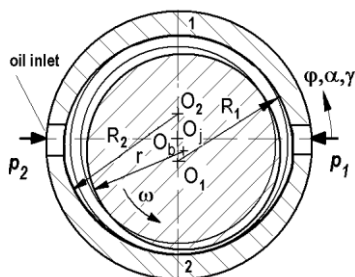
Geometry of 2-lobe journal bearings; a)- 2-lobe bearing; r - journal radius (m), R_b - bush radius (m), R_1, R_2 - radius of upper and bottom lobe, O_b, O_j, O_1, O_2 - centre of bearing, journal, bottom and upper bearing halves, p_1, p_2 - oil supply pressure, α - attitude angle ($^\circ$), γ - angle of lobe centre ($^\circ$), φ - circumferential coordinate ($^\circ$), ω - angular velocity (s^{-1})
